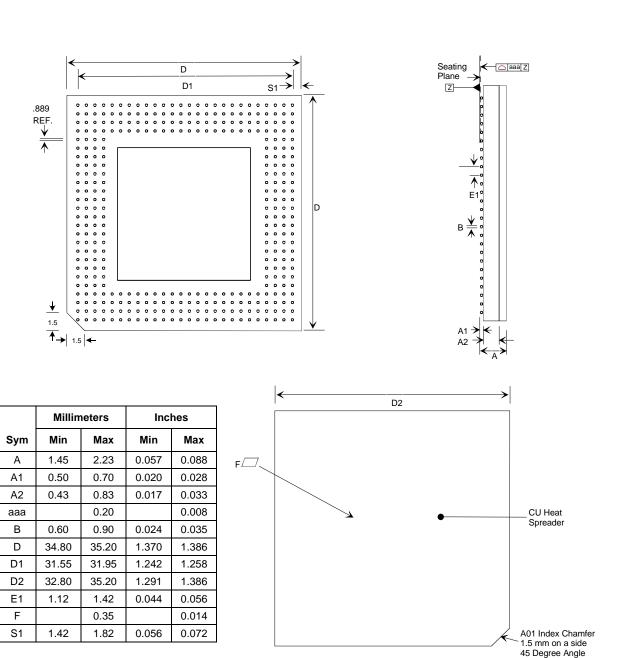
352-Terminal BGA Mechanical Package Outline
